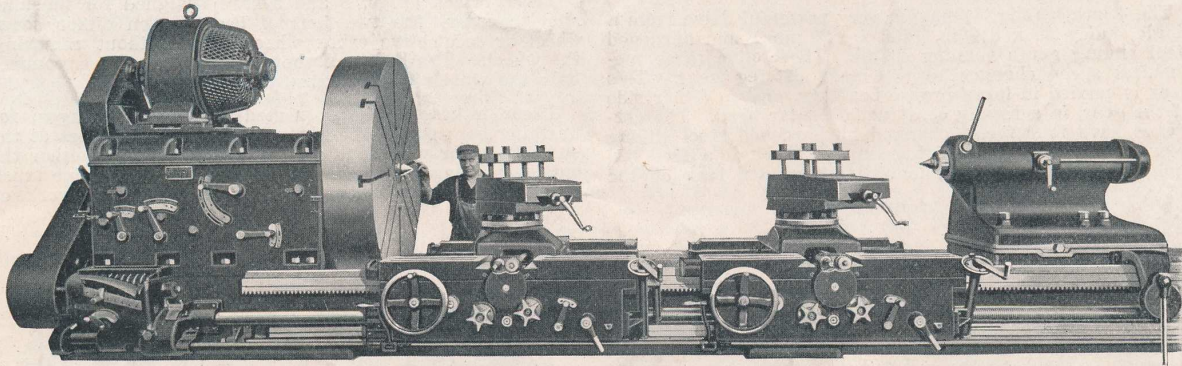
BETTS-BRIDGEFORD HEAVY DUTY SCREW CUTTING LATHE, TYPE A1200
